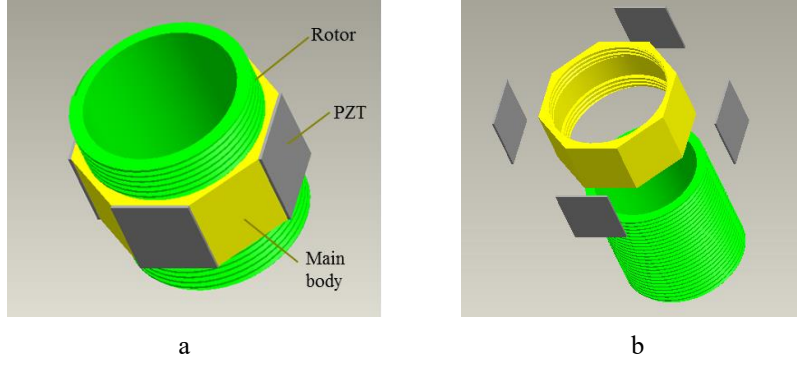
Structure of the hollow, linear, nut-type ultrasonic motor: a - assembly view; b - exploded view
